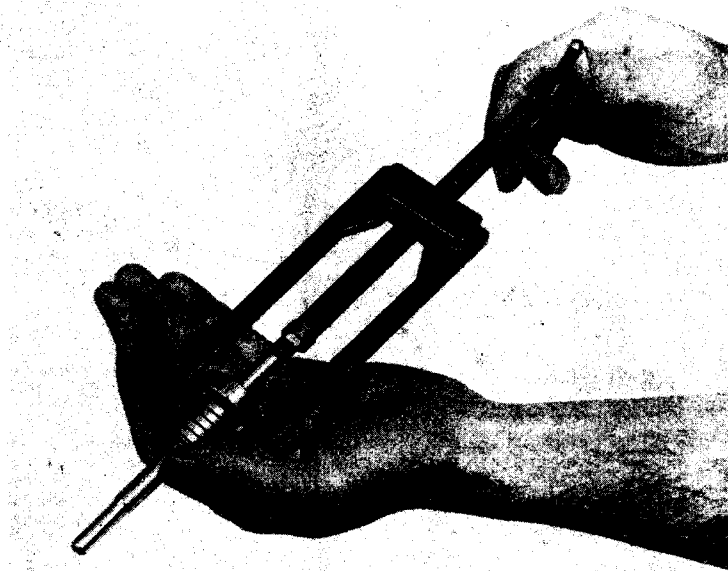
RIGHT DRIVE SHAFT BEARING REMOVAL
